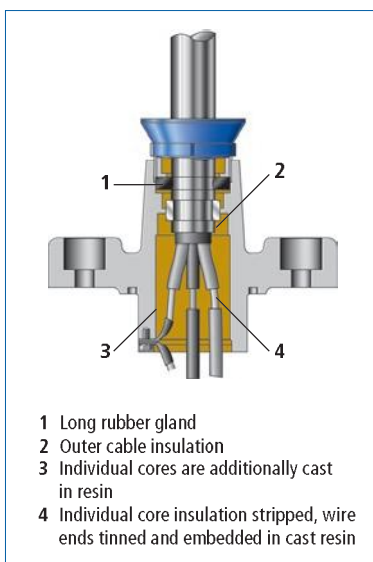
a: Sectional drawing of an absolutely watertight cable entry system on a pump
